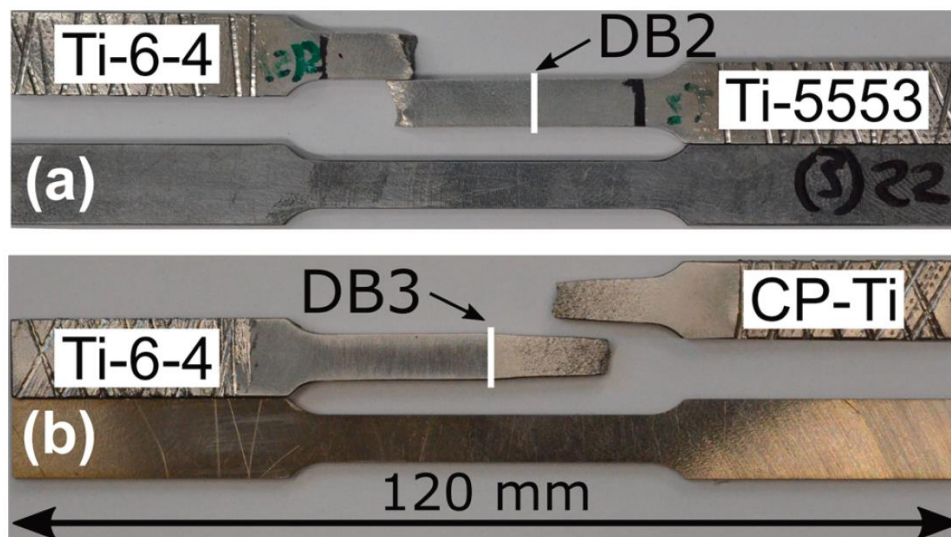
Tensile specimens made via FAST-DB showing that the failure occurred in the weakest material instead of the bond [9].
